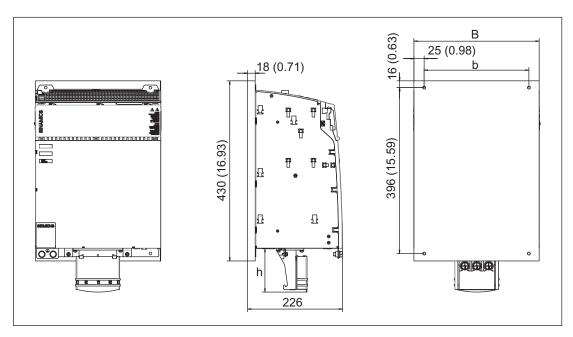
Dimension drawing of 132 A and 200 A Motor Modules Booksize with cold plate, all dimensions in mm and (inches)
